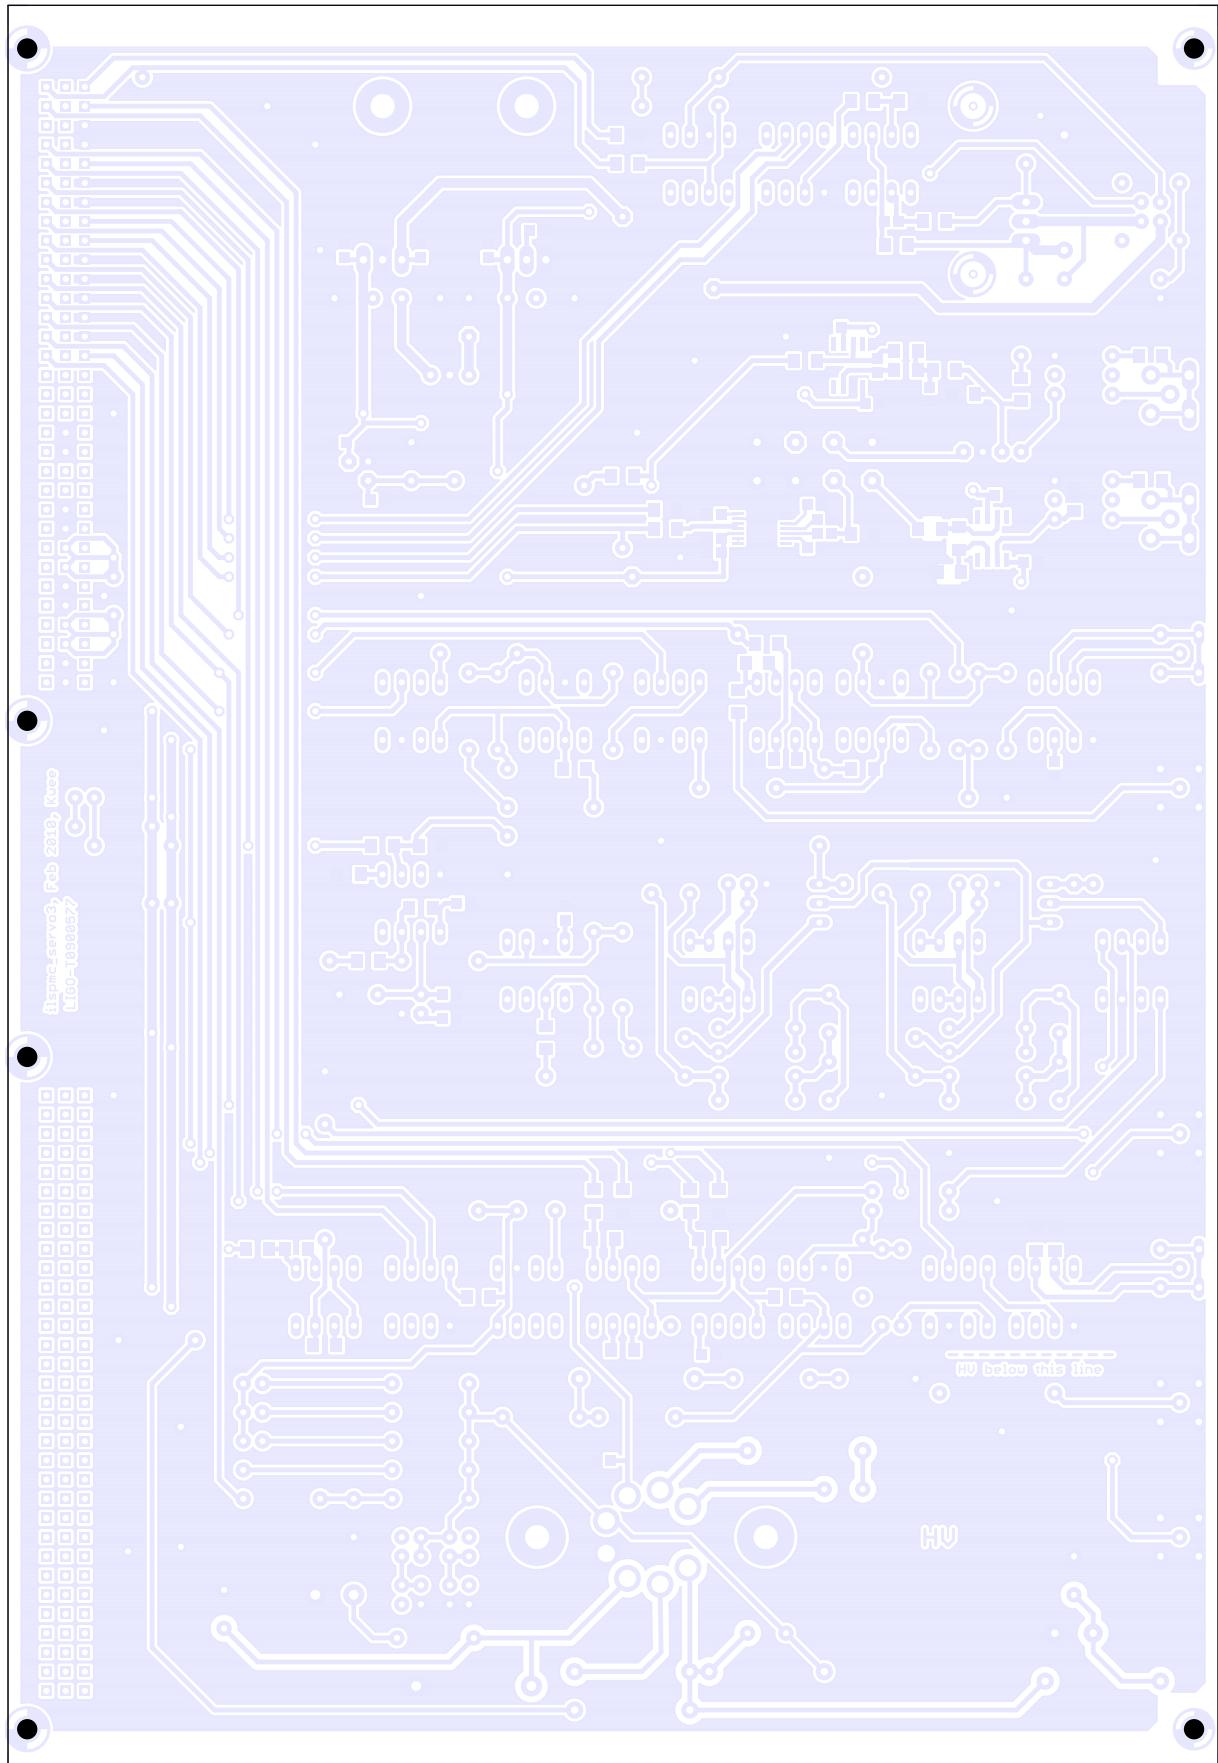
Board bottom view showing drills with 2.7 mm (0.106 in) diameter
